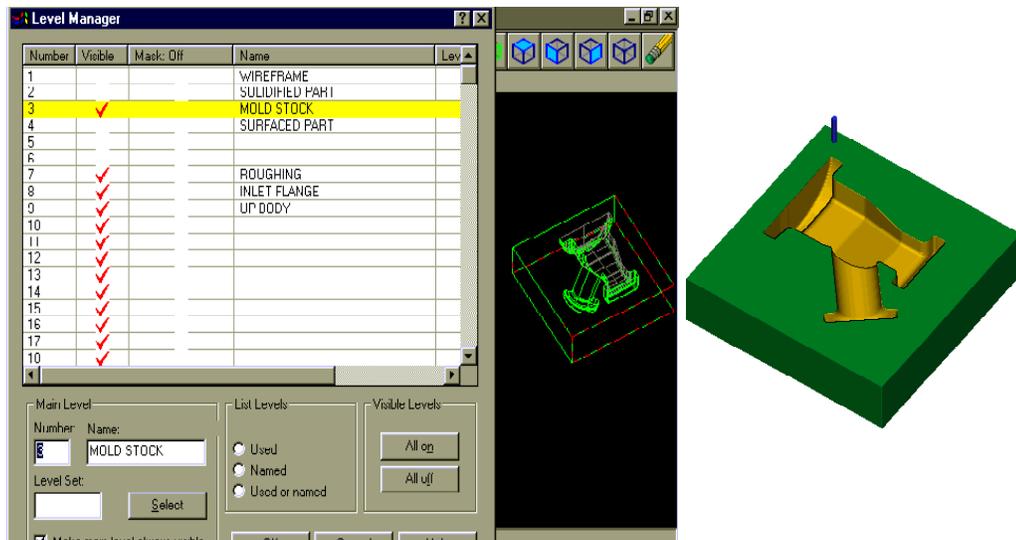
A CAD/CAM a of die-cast half body mold for a sampling valve.
